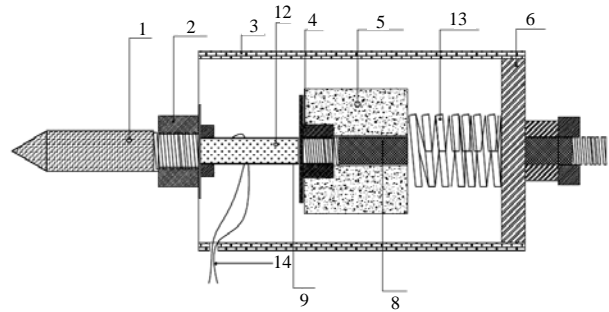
Cross sectional view of the assembled mechanical components of the vibrometer
